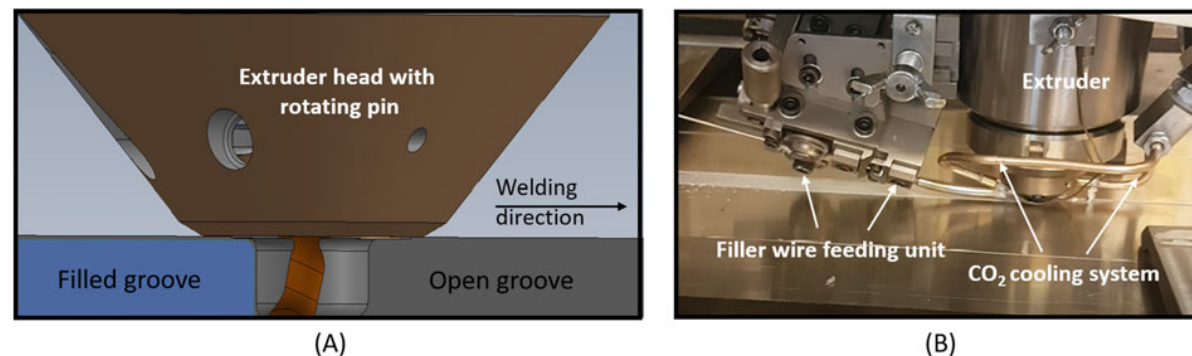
Illustrations of the experimental set-up during butt welding of aluminium plates. A: Close-up of the “pin-in-groove” situation. B: Snapshot of the HYB PinPoint extruder in operation.
